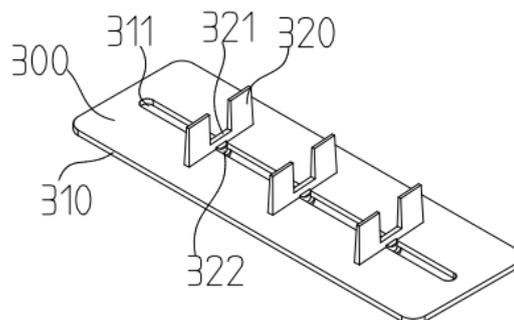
is a schematic diagram of the disassembly plate structure provided in the design embodiment; Shape Analysis. The support plate 320 is a wedge structure. The thickness of one end of the support plate 320 is greater than that of the other end of the support plate 310. The position of the support plate 320 and the base plate 310 in contact with one end is greater than the thickness of jack 111, and the thickness of the support plate 320 is greater than the thickness of jack 111 at least not less than 1/3 of the height of the support plate 320, so that the support jack 111 can be achieved. The clamping unit 113 comes out from the slot 211, thus taking out the plug plate 210 from the jack 111, and disconnects the box body 100 from the box cover 200
